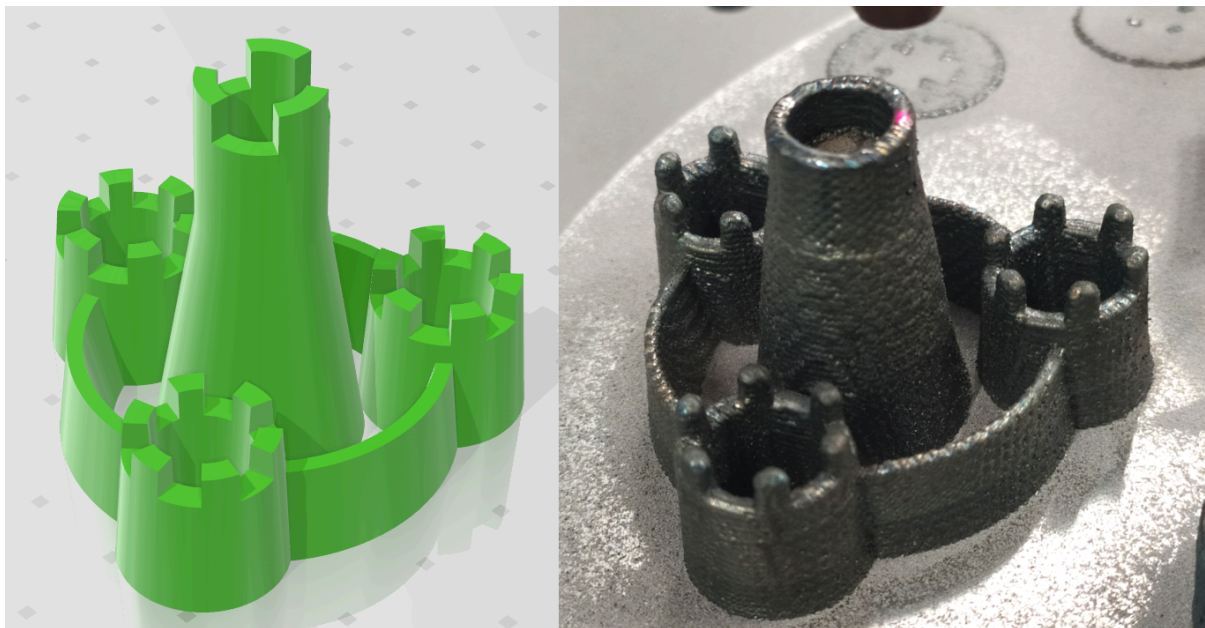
3D printed object (during the printing process) with a laser-welding machine utilizing the direct energy deposition method.
